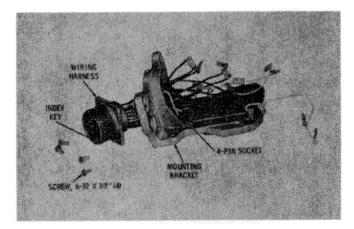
Mounting Bracket and Switch Wiring Harness
